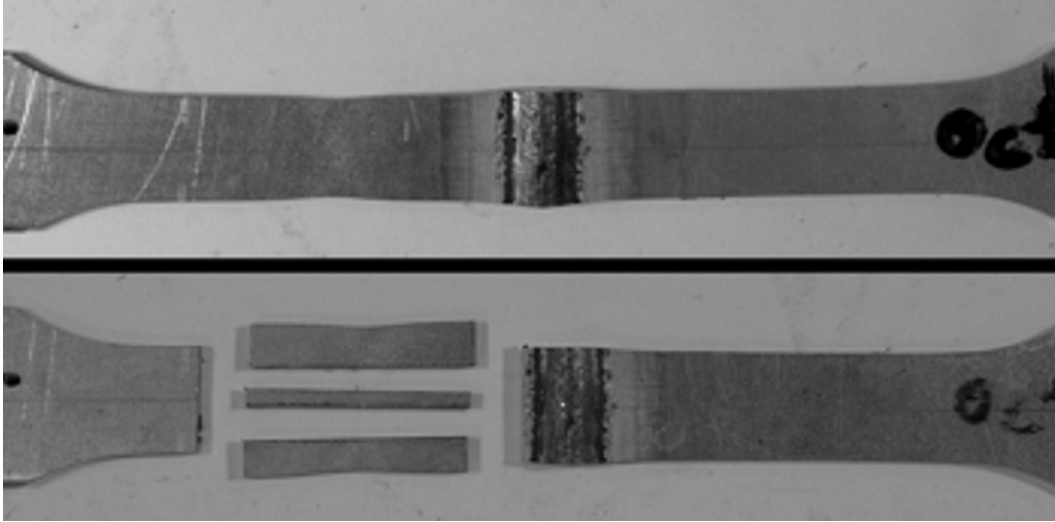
An example partially fractured weld tensile specimen that had been loaded just past localized necking in the BM. The necked region was cross-sectioned for examination.
